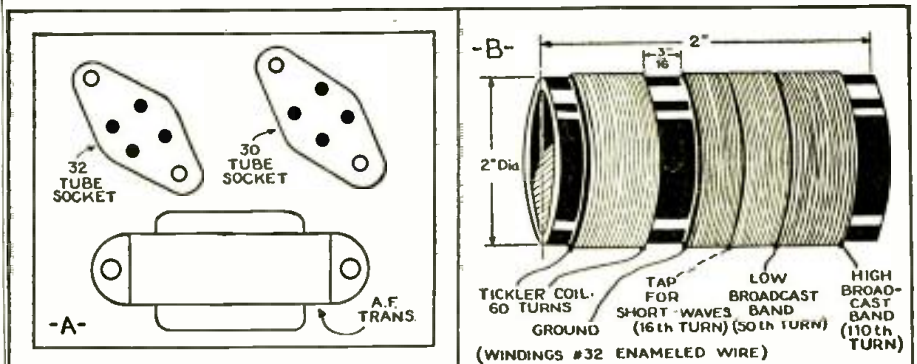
The tube subpanel and coil winding details for the 2 tube set.
